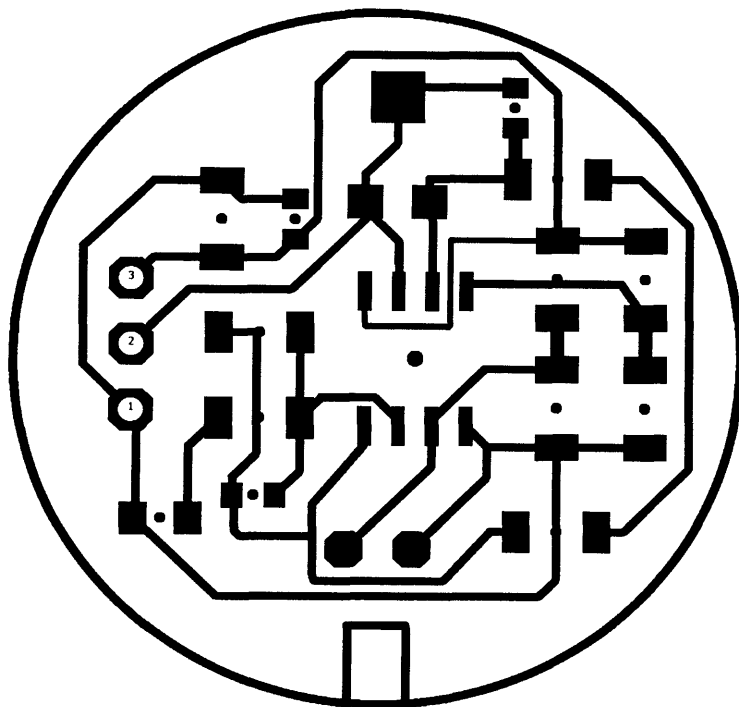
PCB of the amplifier circuit for piezo-ceramic sensors with adjustable gain.
